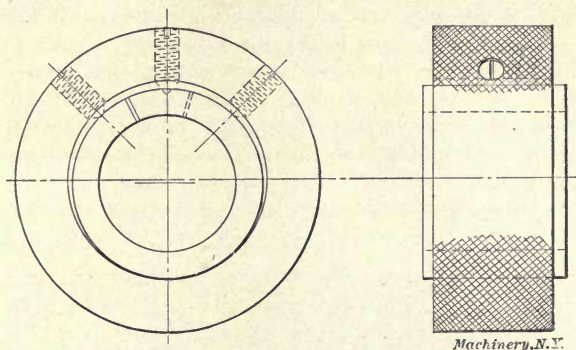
Design of Lap and Lap-holders for Making Plug Gages
